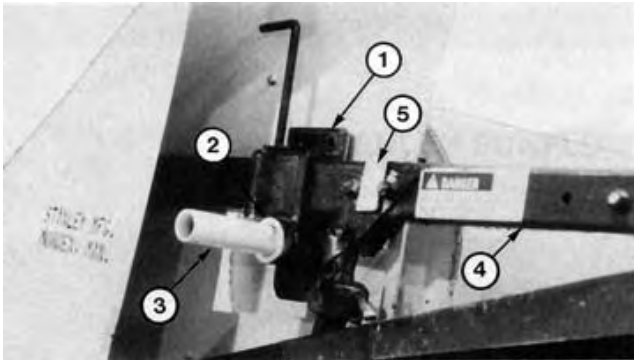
Reel Mount: (1) Reel Bearing Bracket, (2) Locking Collar, (3) Reel Shaft, (4) Reel Arm, (5) Divider Mounting Bracket.
